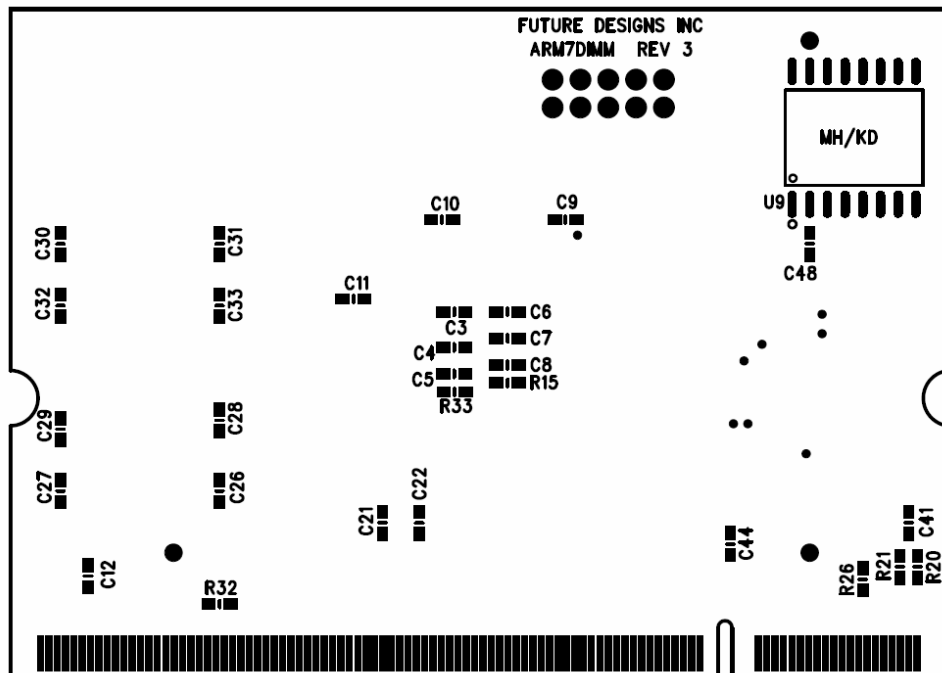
SOMDIMM-LPC2478 Bottom Side
